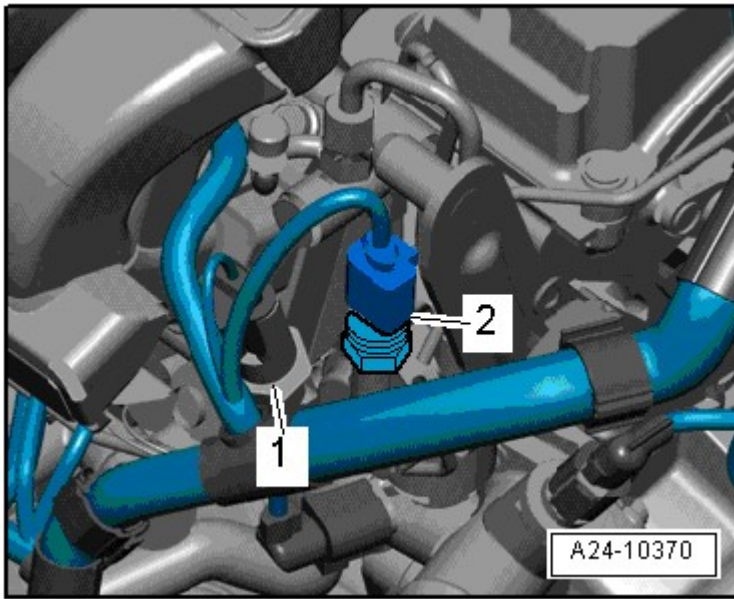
Locating Fuel Pressure Sensor -G247- And Low Fuel Pressure Sensor -G410-
